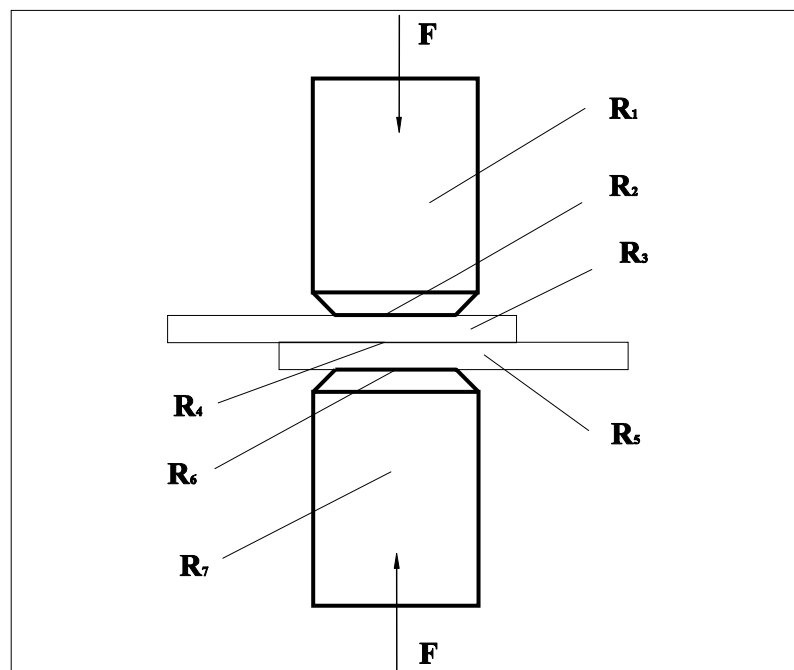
ohmic resistances in resistance spot welding
